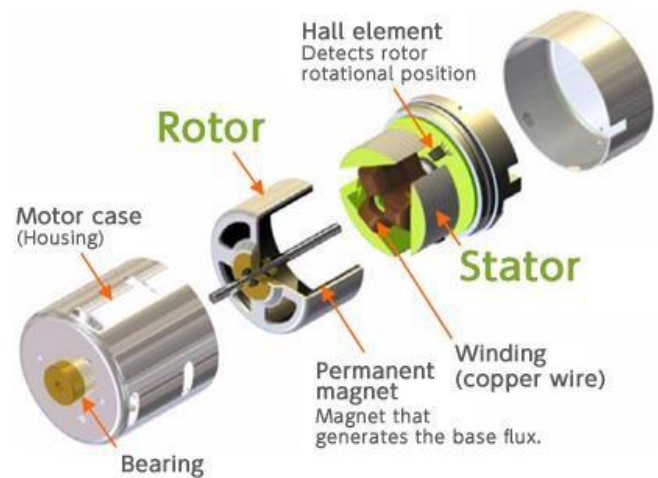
A detailed diagram of outer rotot type BLDC motor
